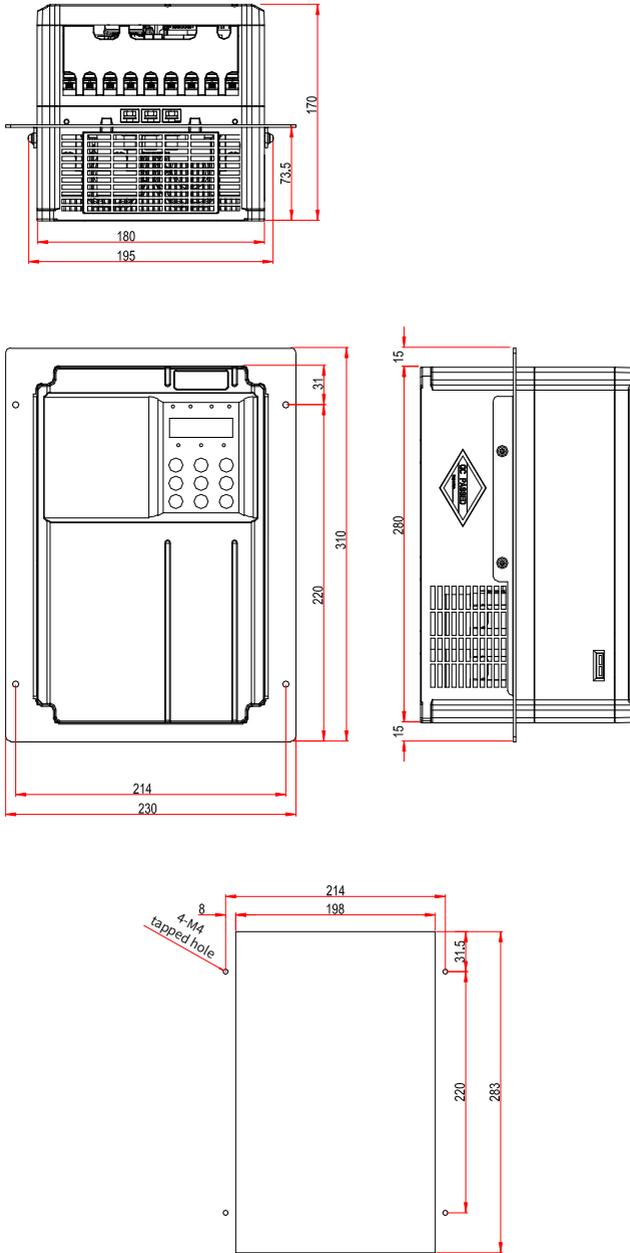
Intermediate mounting bracket dimensions and hole spacing for 15 kW AC drive models
